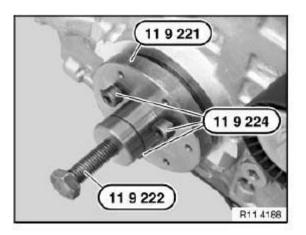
Pushing Special Tool Onto Crankshaft Courtesy of BMW OF NORTH AMERICA, INC.
